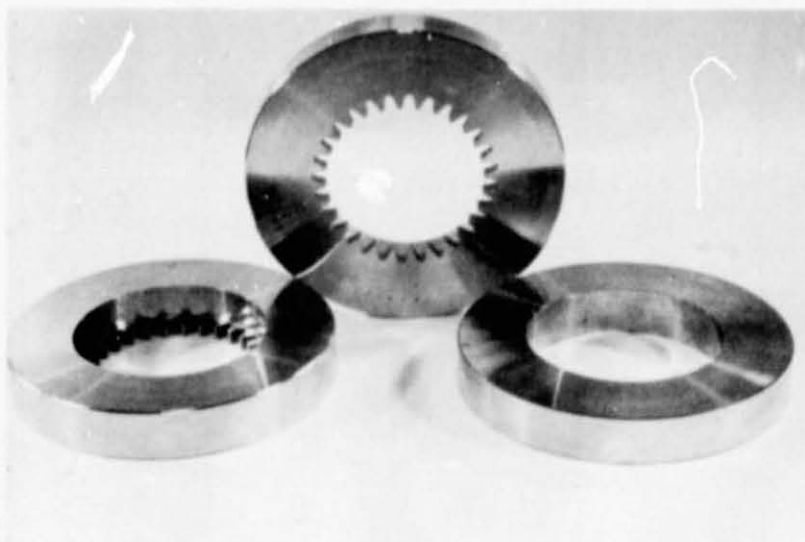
Tooling inserts utilized for forging gear blanks with and without teeth.
